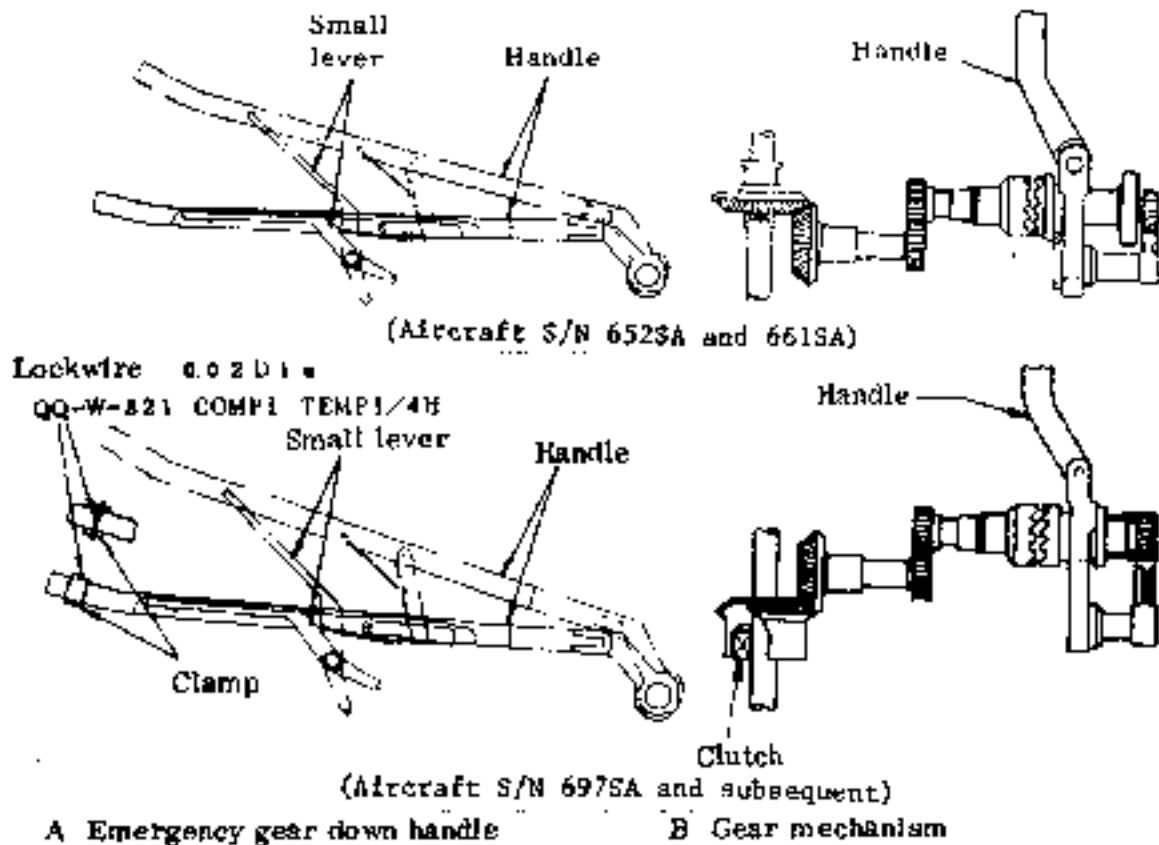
Emergency gear down handle (A) and gears (B)
